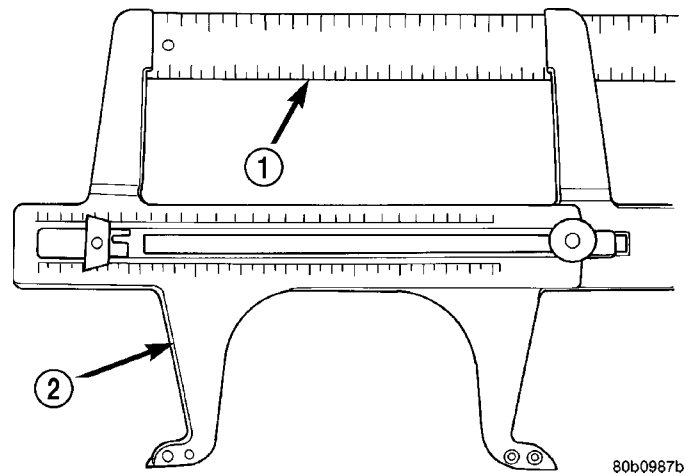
SETTING GAUGE TO PARK BRAKE SHOE MEASUREMENT
